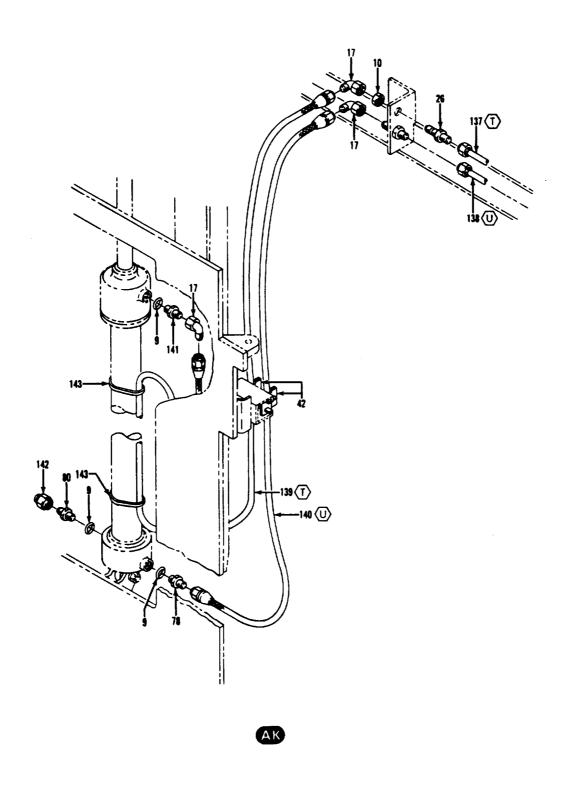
Tubing Installation (Sheet 13 of 17)
